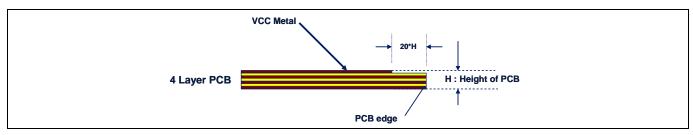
Removing metal of power plane from the edge of PCB (20\*H rule)
